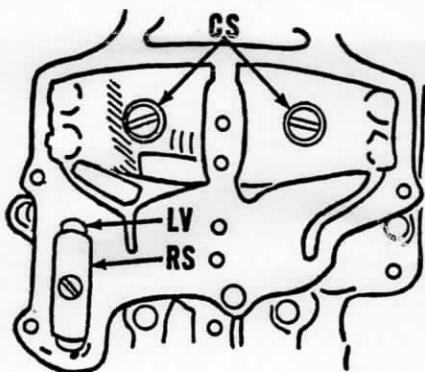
Crankcase with carburetor and inlet manifold removed. The reed-type crankcase bleeder valve (LV) and reed stop (RS) can be removed for service after manifold is off. To disassemble the crankcase, the two center main bearing screws (CS) in inlet ports must be removed.
